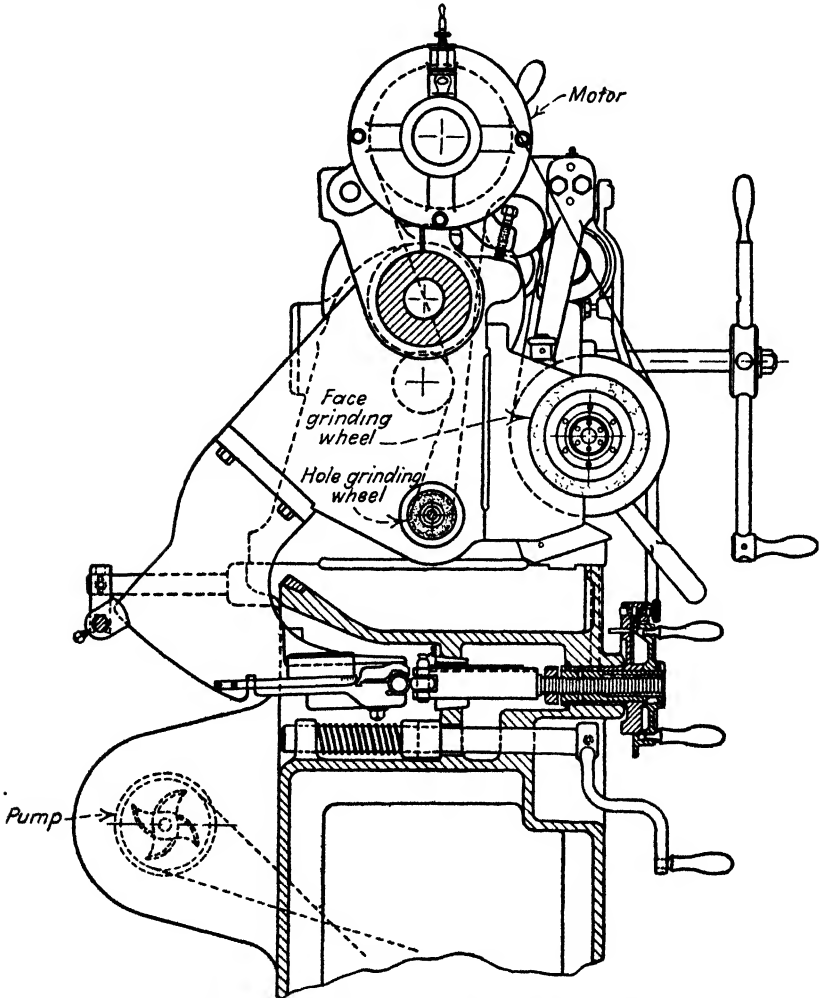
Section of Bryant No. 12 A hole-and-face grinder.
